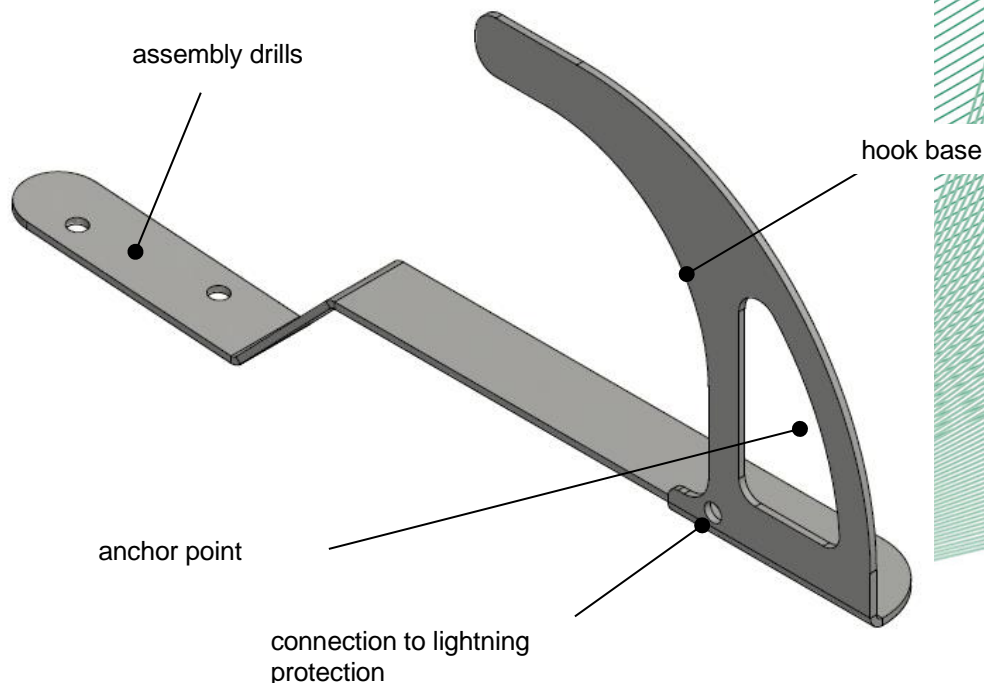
Safety roof hook type B, type ABS-Lock® DH-04-OG
